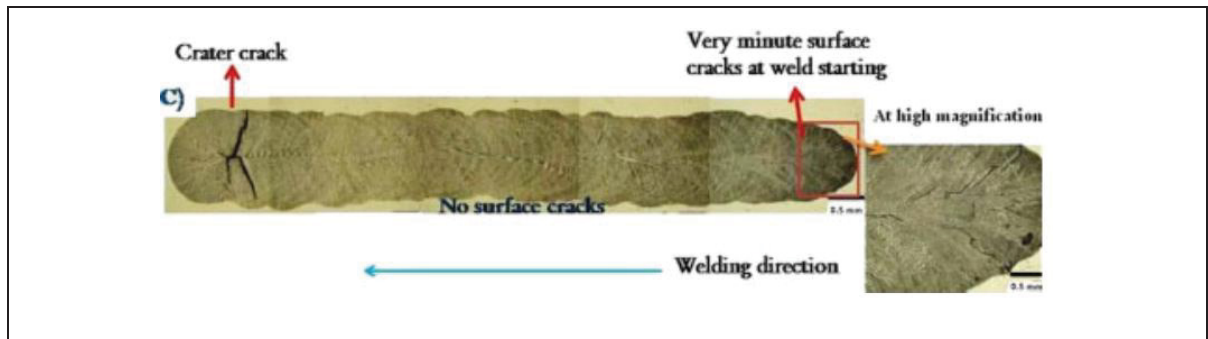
Cracking during Keyhole mode laser welding
